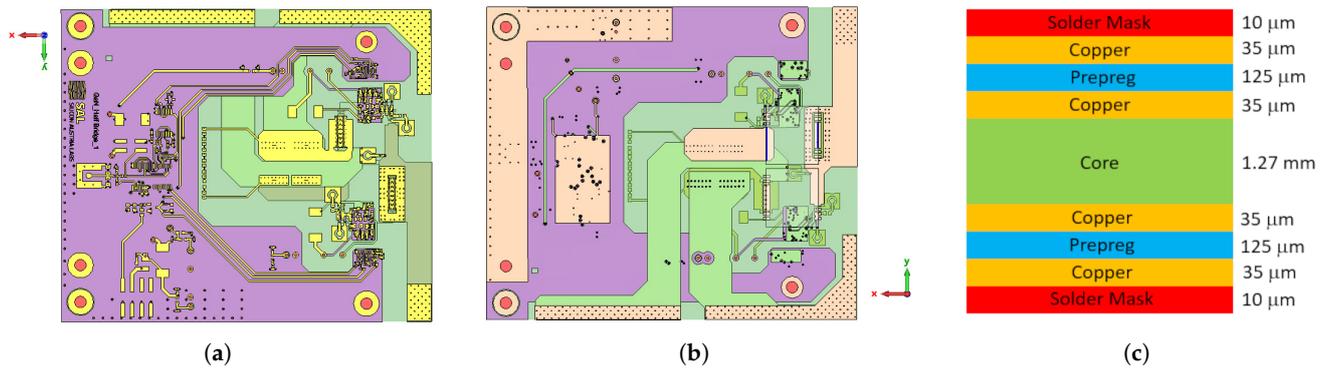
(a,b) are the top and bottom views of the 3D model of the test PCB. The 3D geometry of the PCB is imported from odb++ data files. (c) detailed stackup of the test PCB using 4 metal layers.
